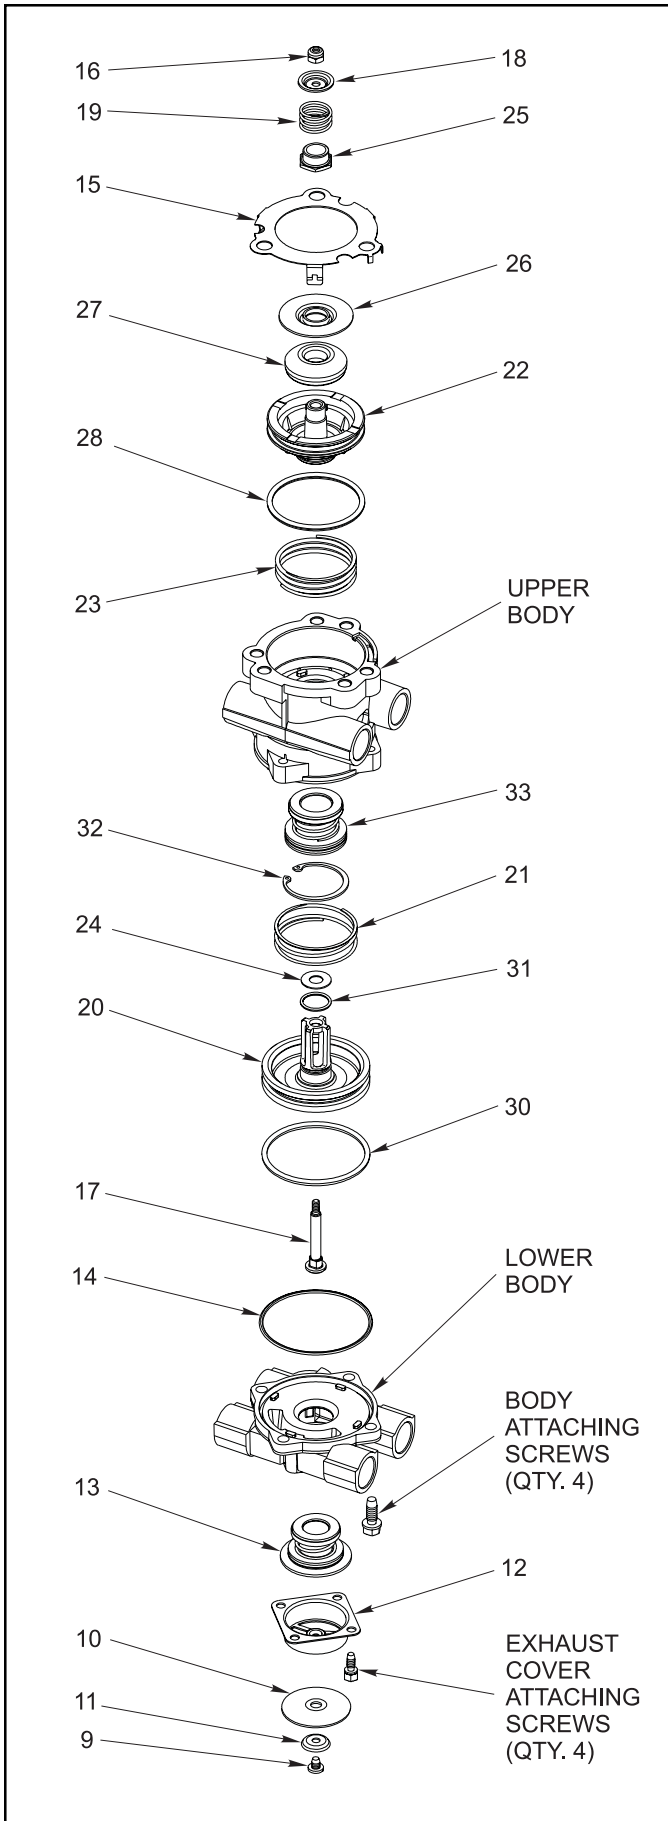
E-8P BRAKE VALVE EXPLODED VIEW
